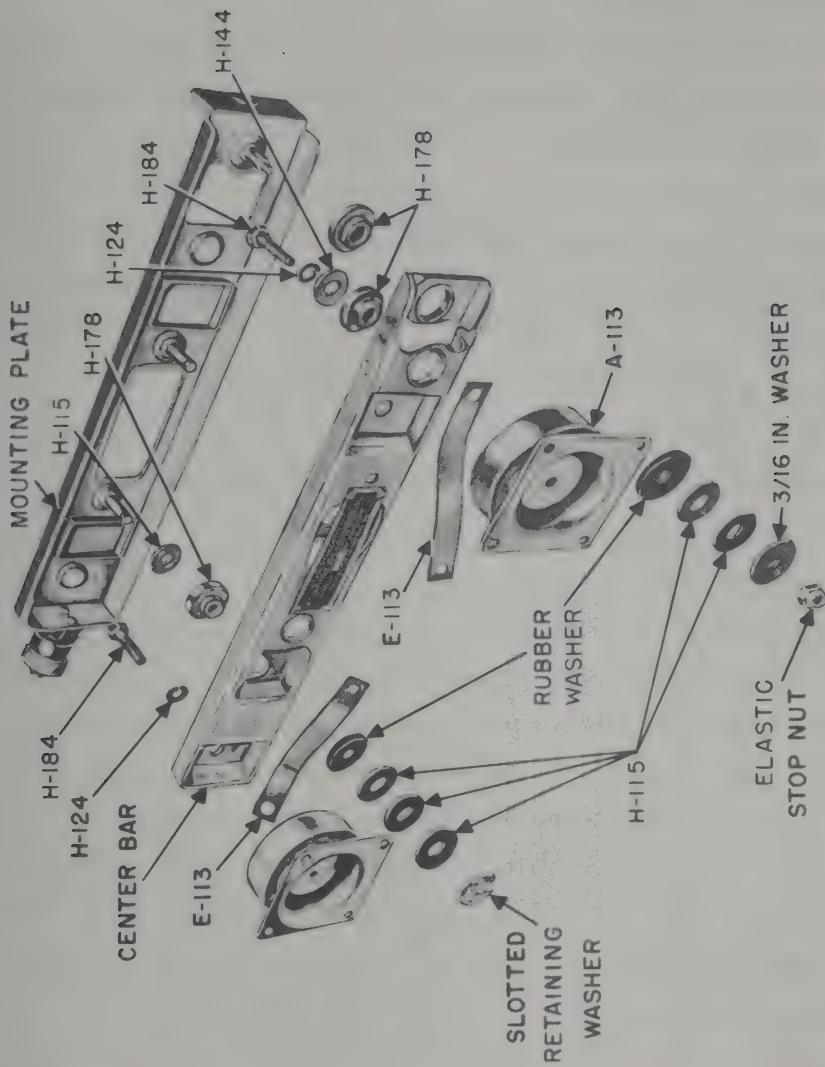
Mounting MT-1339/MRC-20, Exploded View.
